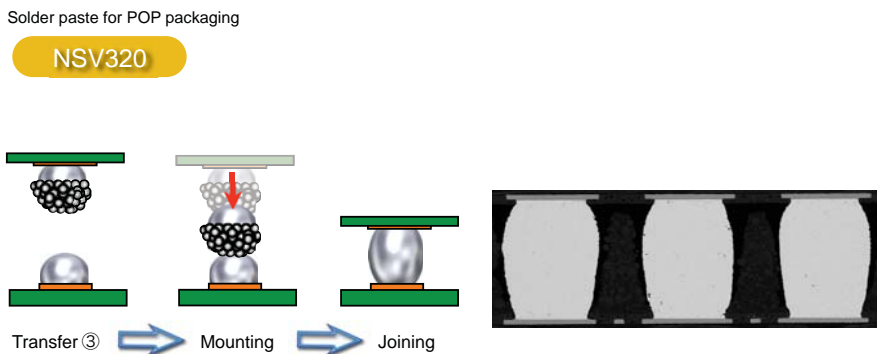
Featuring excellent solder transfer property, NSV320 prevents incomplete soldering.
